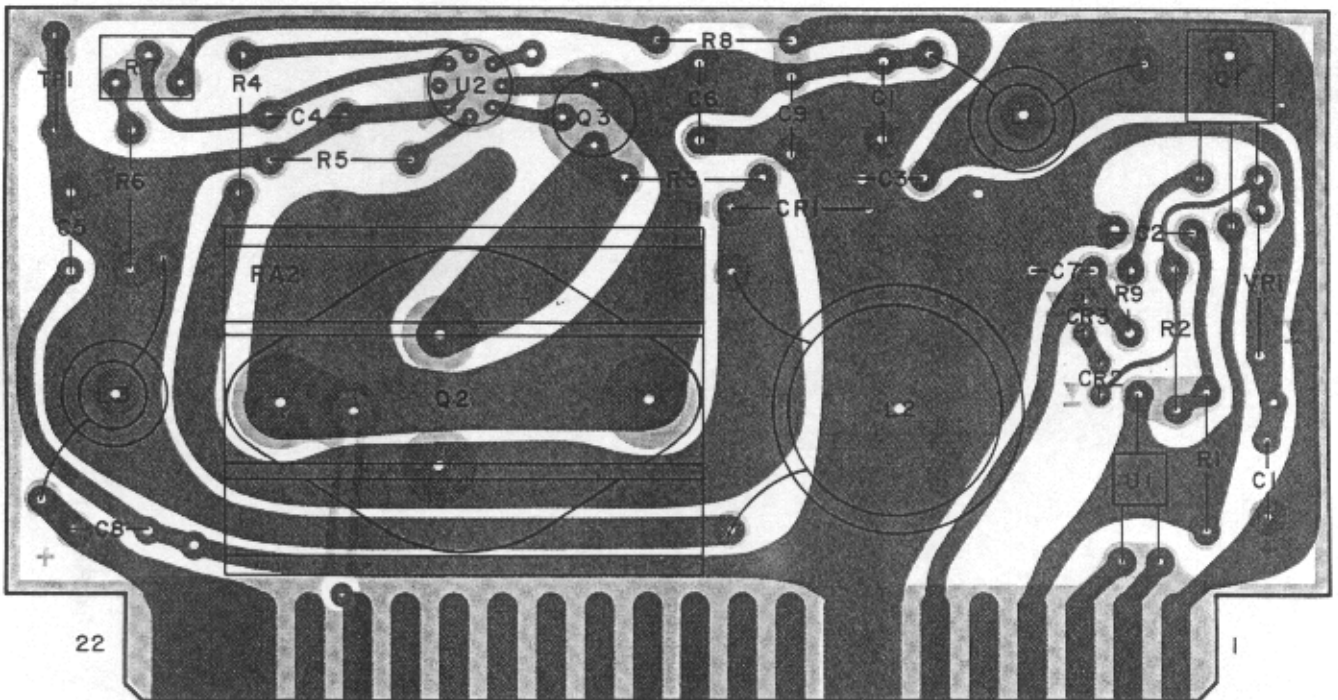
Type 76209 Switching Regulator (A27), Location of Components
